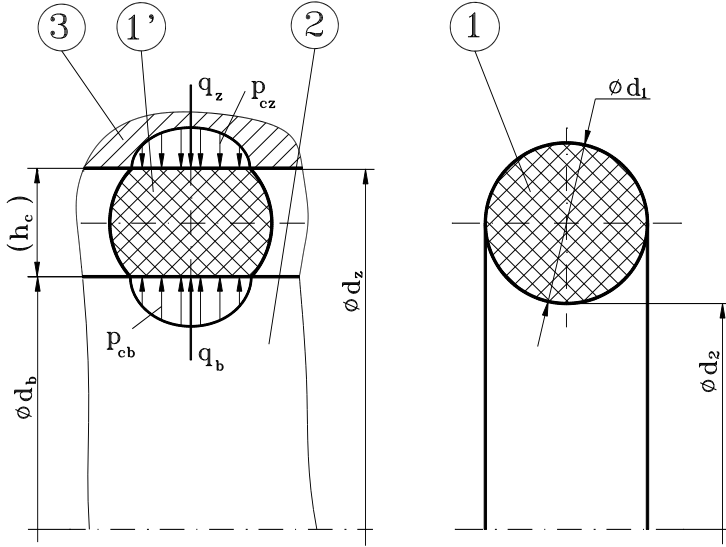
Radial compression of the sealing O-ring after the final assembly
